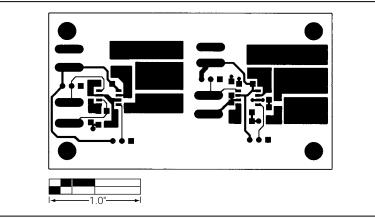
MAX629 EV Kit PC Board Layout—Component Side
